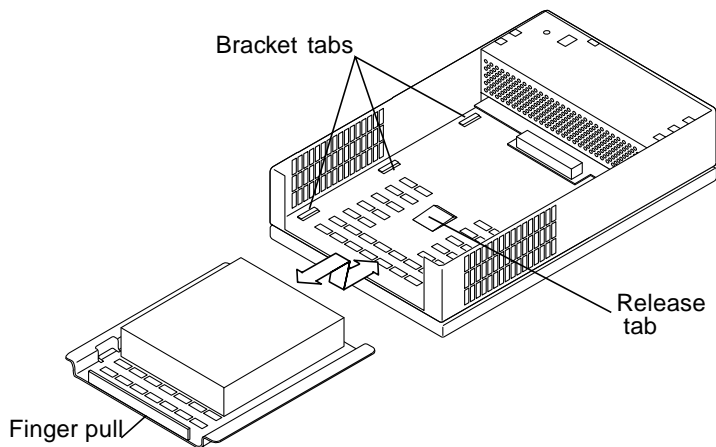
Removing or Replacing the Bracket and Drive
